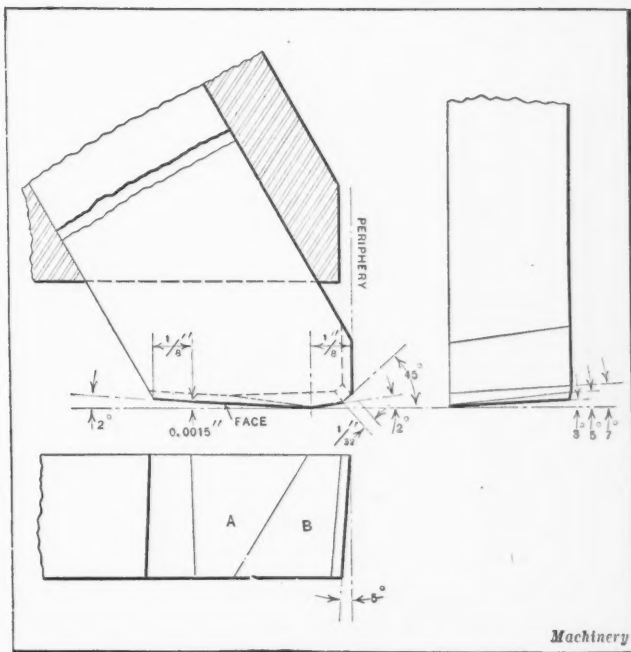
Inserted-tooth Milling Cutter Blade as ground when the Cutter Axis is exactly at Right Angles to the Surface being milled
